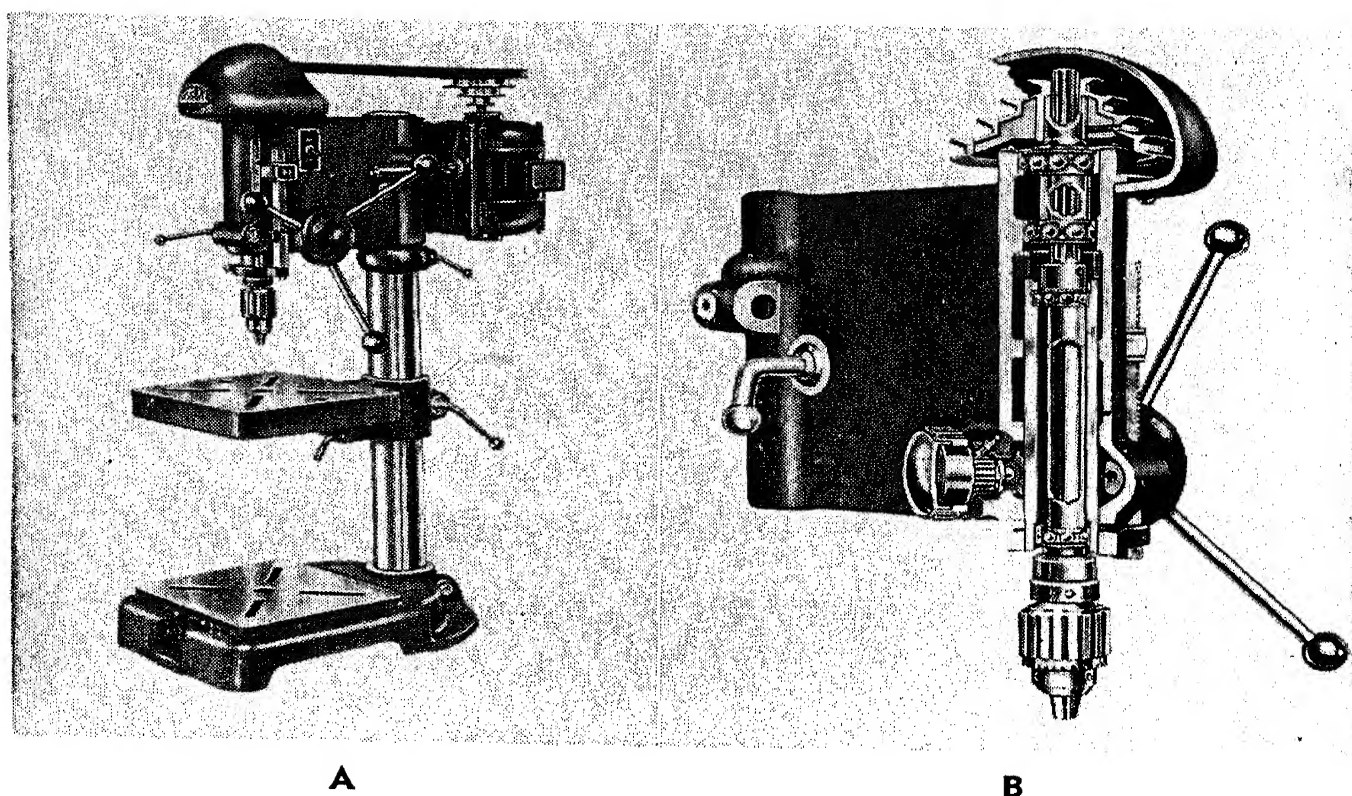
A 15 in. bench type drill press and a cross-section of the head showing the spindle construction. (Courtesy Atlas Press Co.)
